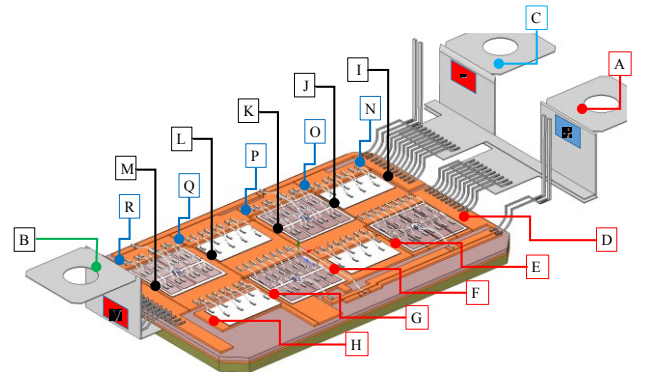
3-Dimension view of the V-phase leg of HP1 FS400R07A1E3 power module layouts with measuring points.
